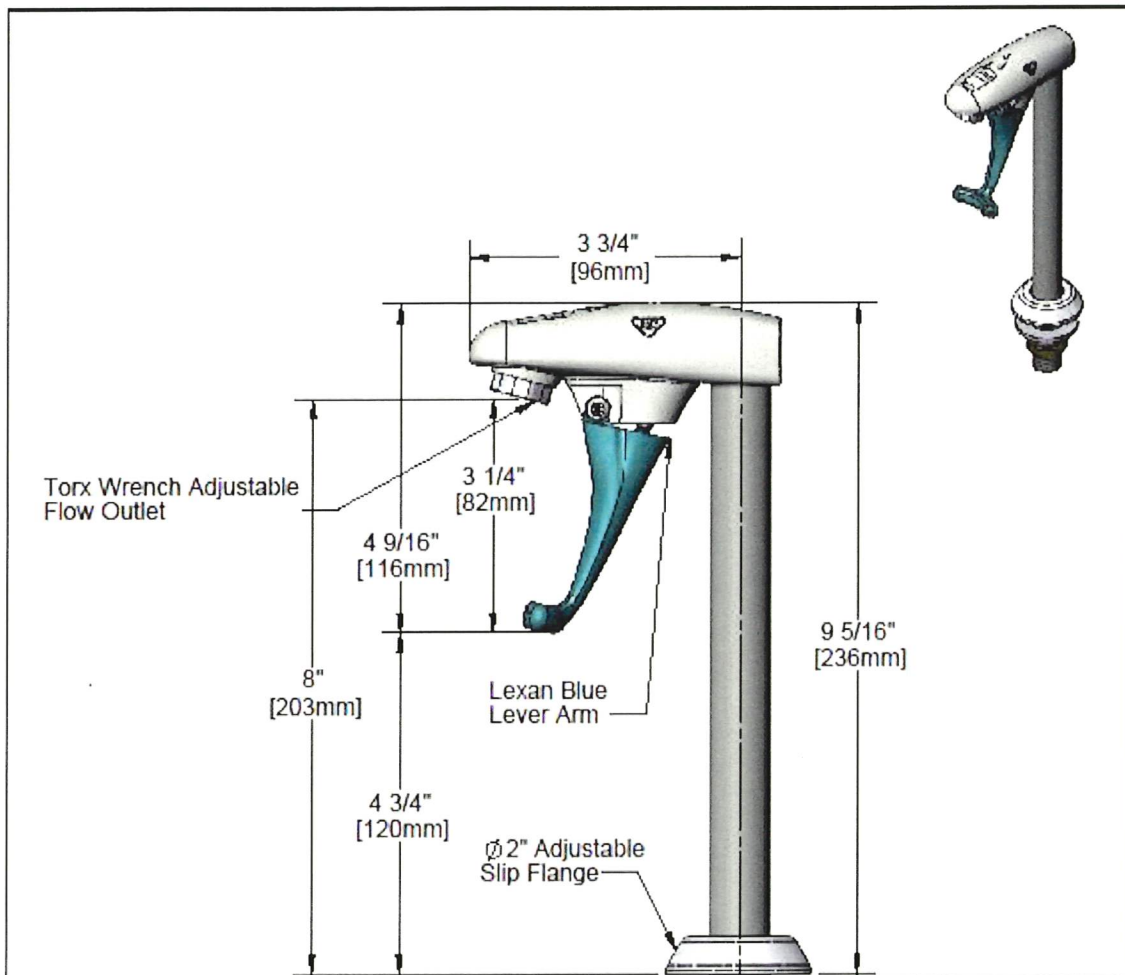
Pedestal Type Glass Filler, Push Back Design, Adjustable Flange, Blue Self-Closing Lexan Arm
